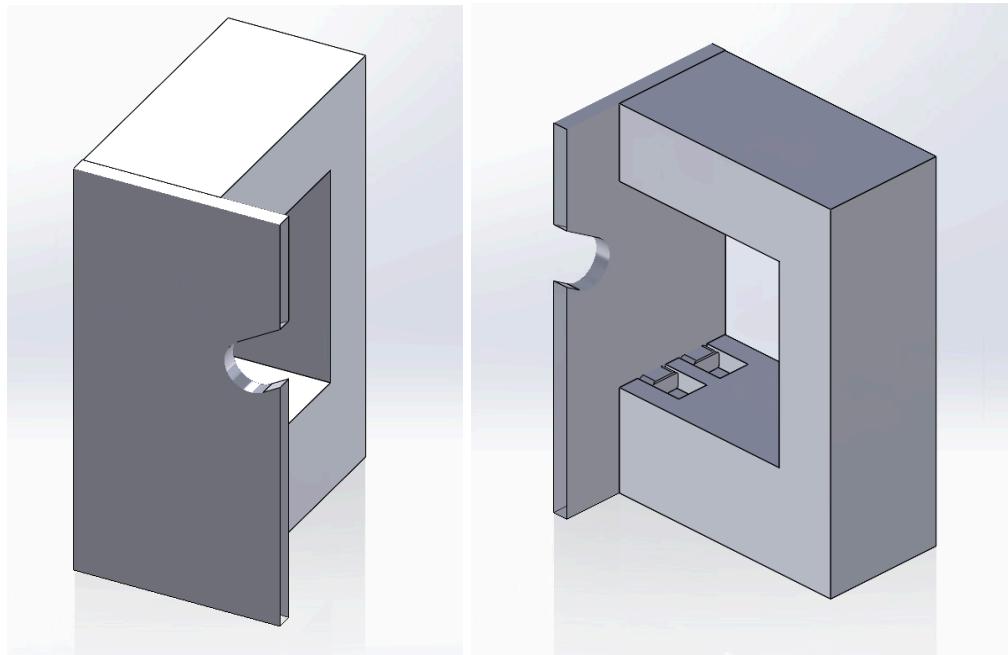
Assembly, This is the CAD model of the assembly. The pins and pin holes have tolerances to ensure the robots can effectively assemble them together.
